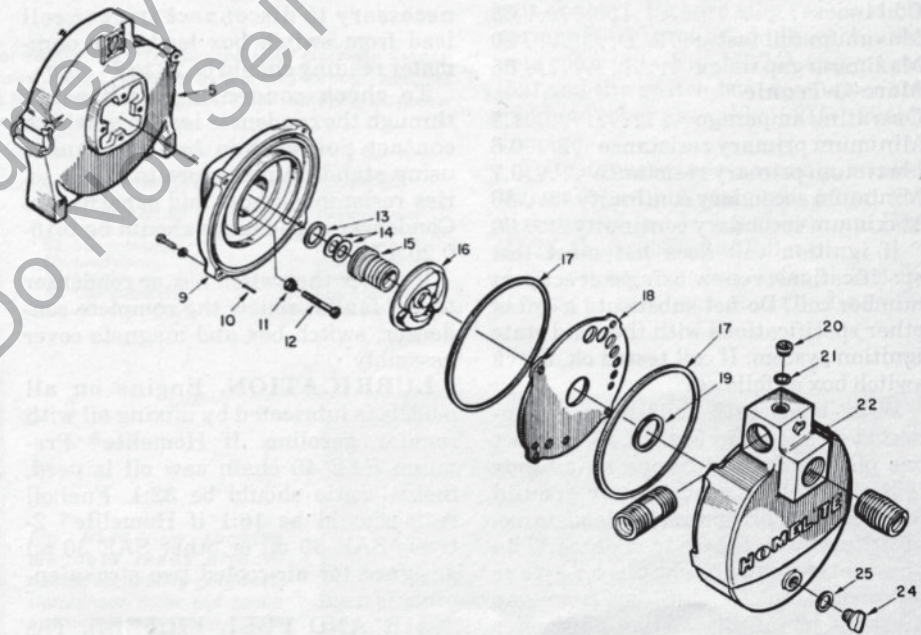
Exploded view of model 251S3 pump assembly. Impeller (16) threads onto stud (86—Fig. HL27) threaded into output end of crankshaft. Use shims (14) as required to maintain 0.020-0.030 clearance between impeller and wear plate (18).
